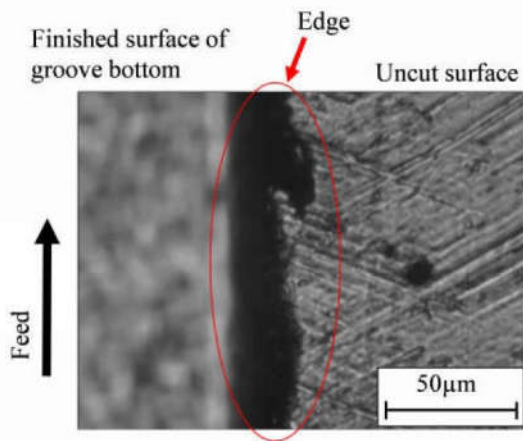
Example of photograph of groove edge after cutting in 60 m/min
